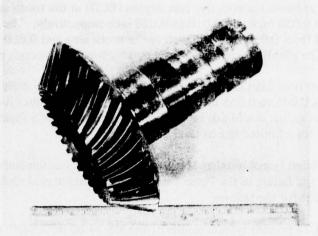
A Typical As-Received Spiral Bevel Pinion Gear, Part Number SK22269.
